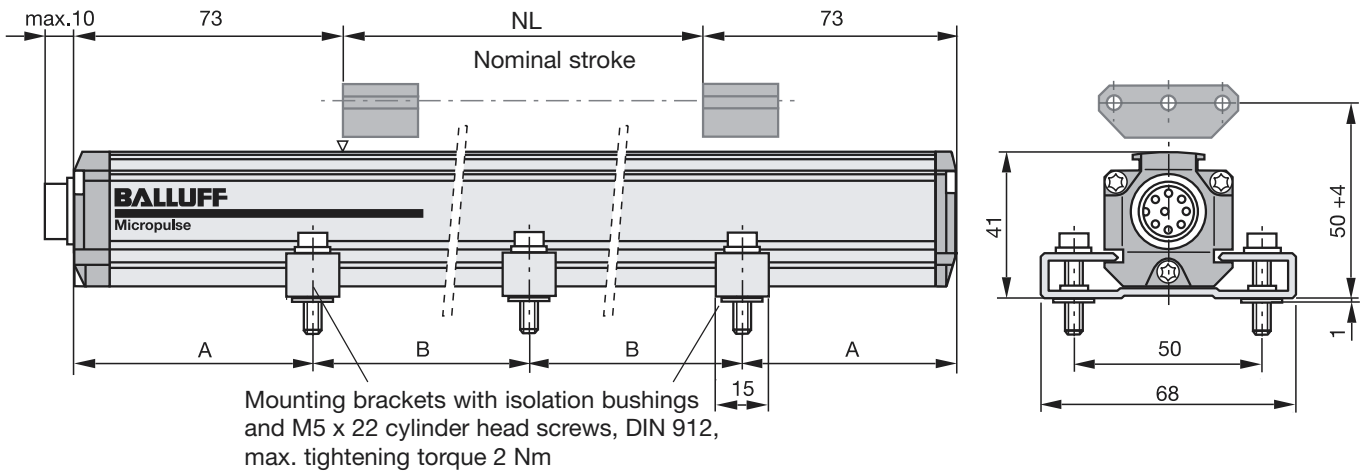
Dimensional drawing (BTL5...P-S32 transducer with floating magnet BTL5-P-3800-2)
